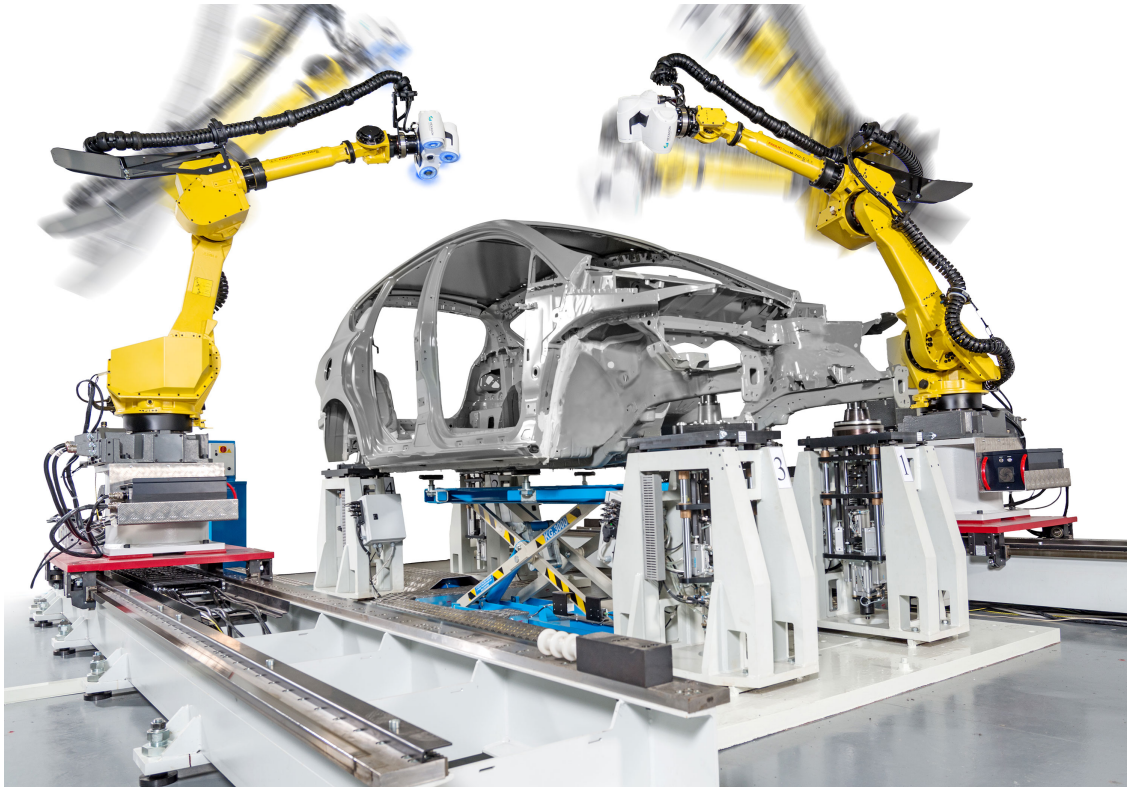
Industrial robots performing measurements on a car body (Courtesy: Hexagon metrology)
